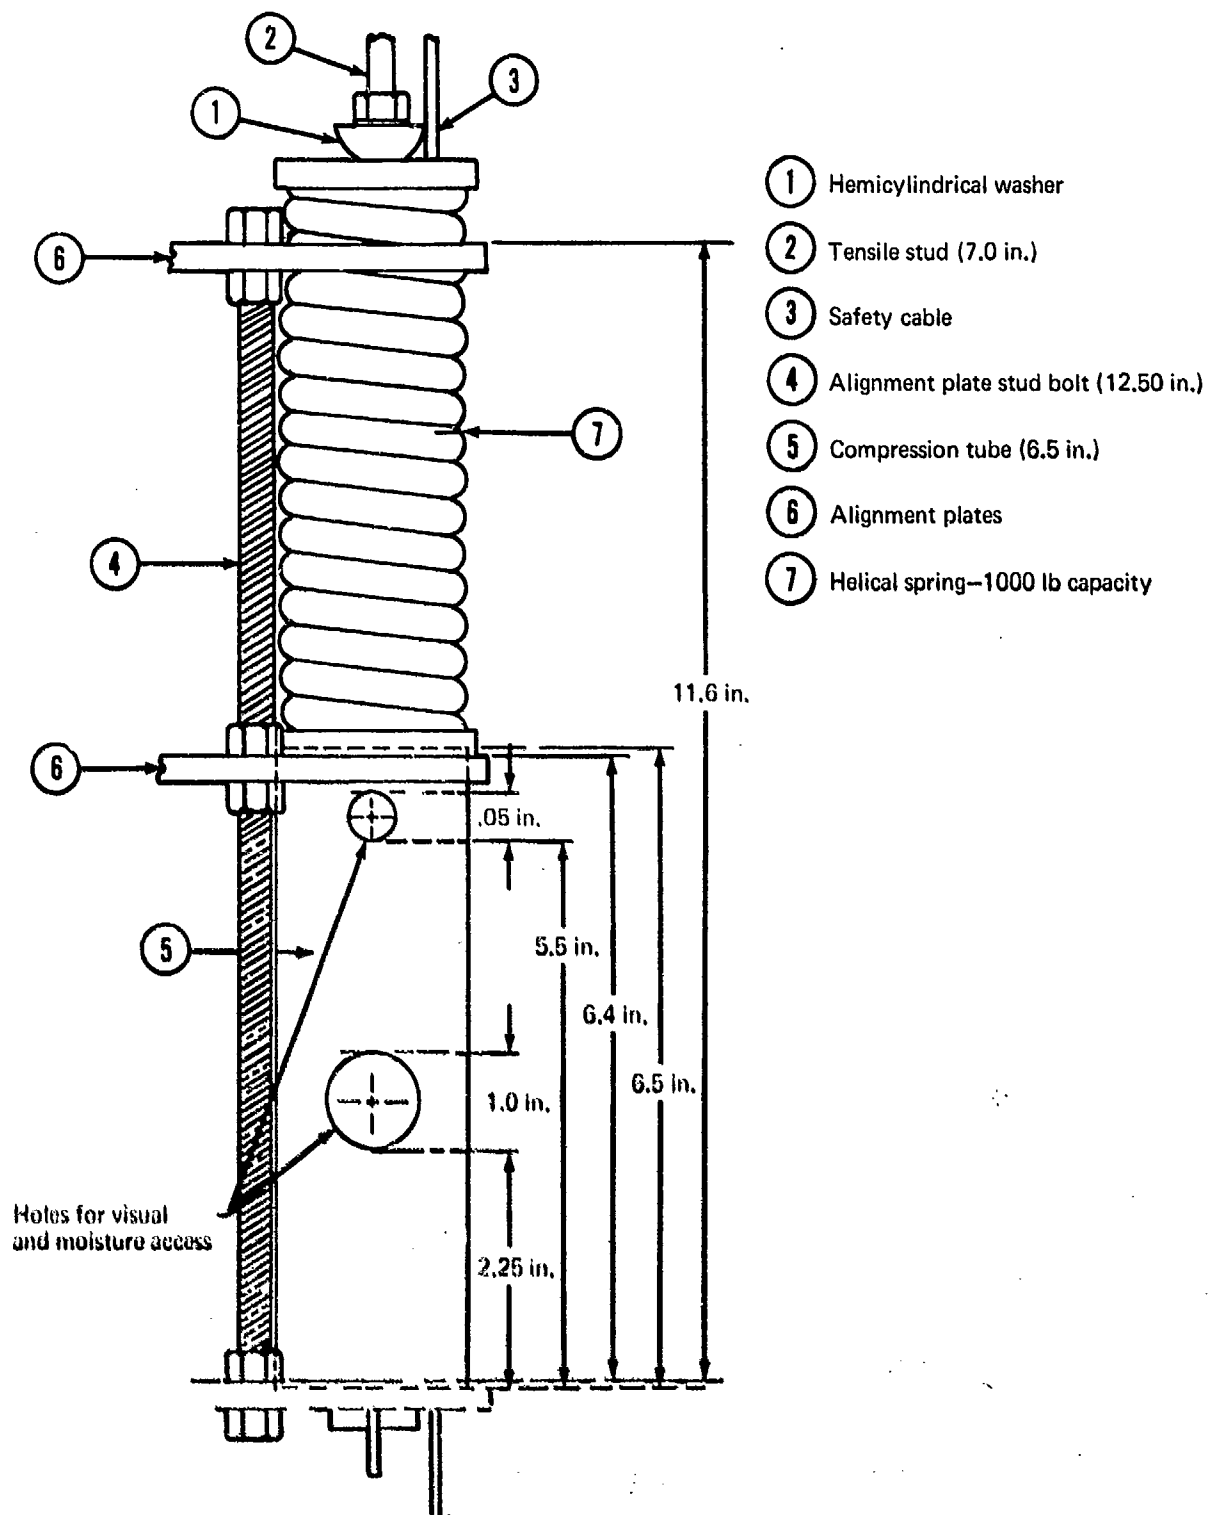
Thick-Adherend Lap-Shear Modified Loading Fixture
